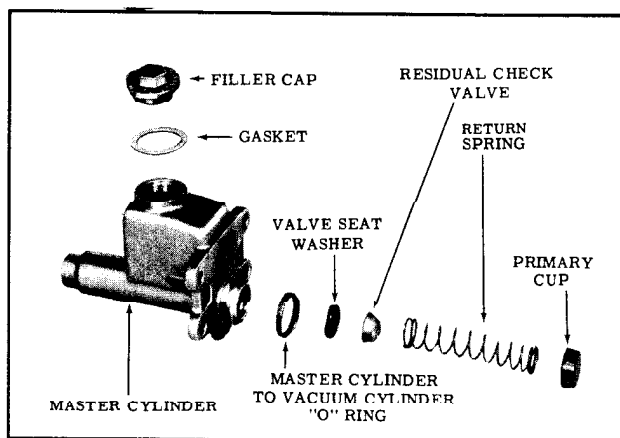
Master Cylinder (Moraine Power Brake)
